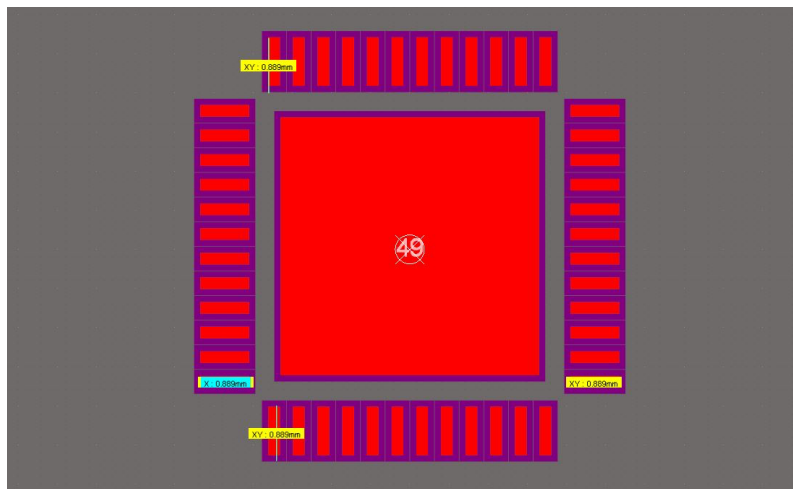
AC108 Pin Pad Layout Design for PCB
